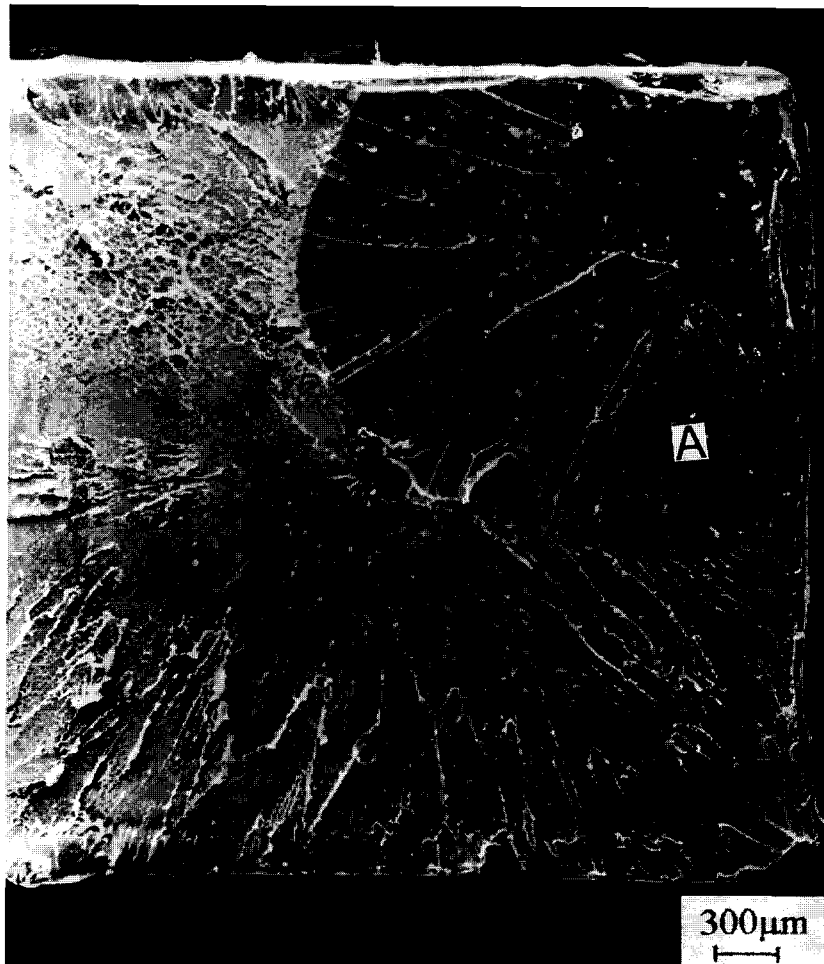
Fatigue fracture surface of injection moulded PEK-C,  $S_{max} = 0.8$  UTS,  $R = 0.1$
